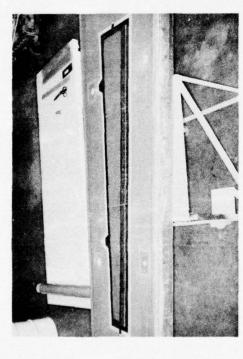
MACHINED CORE SEGMENTS APPLIED TO LOWER SKIN ASSEMBLY
